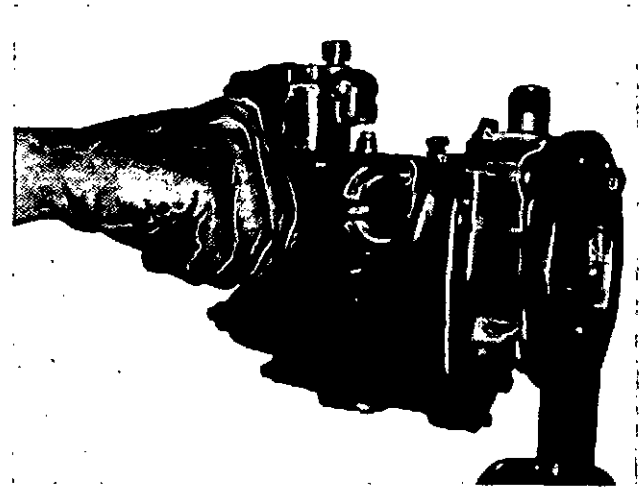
, (F5304). Remove the AFC barrel retaining ring.
